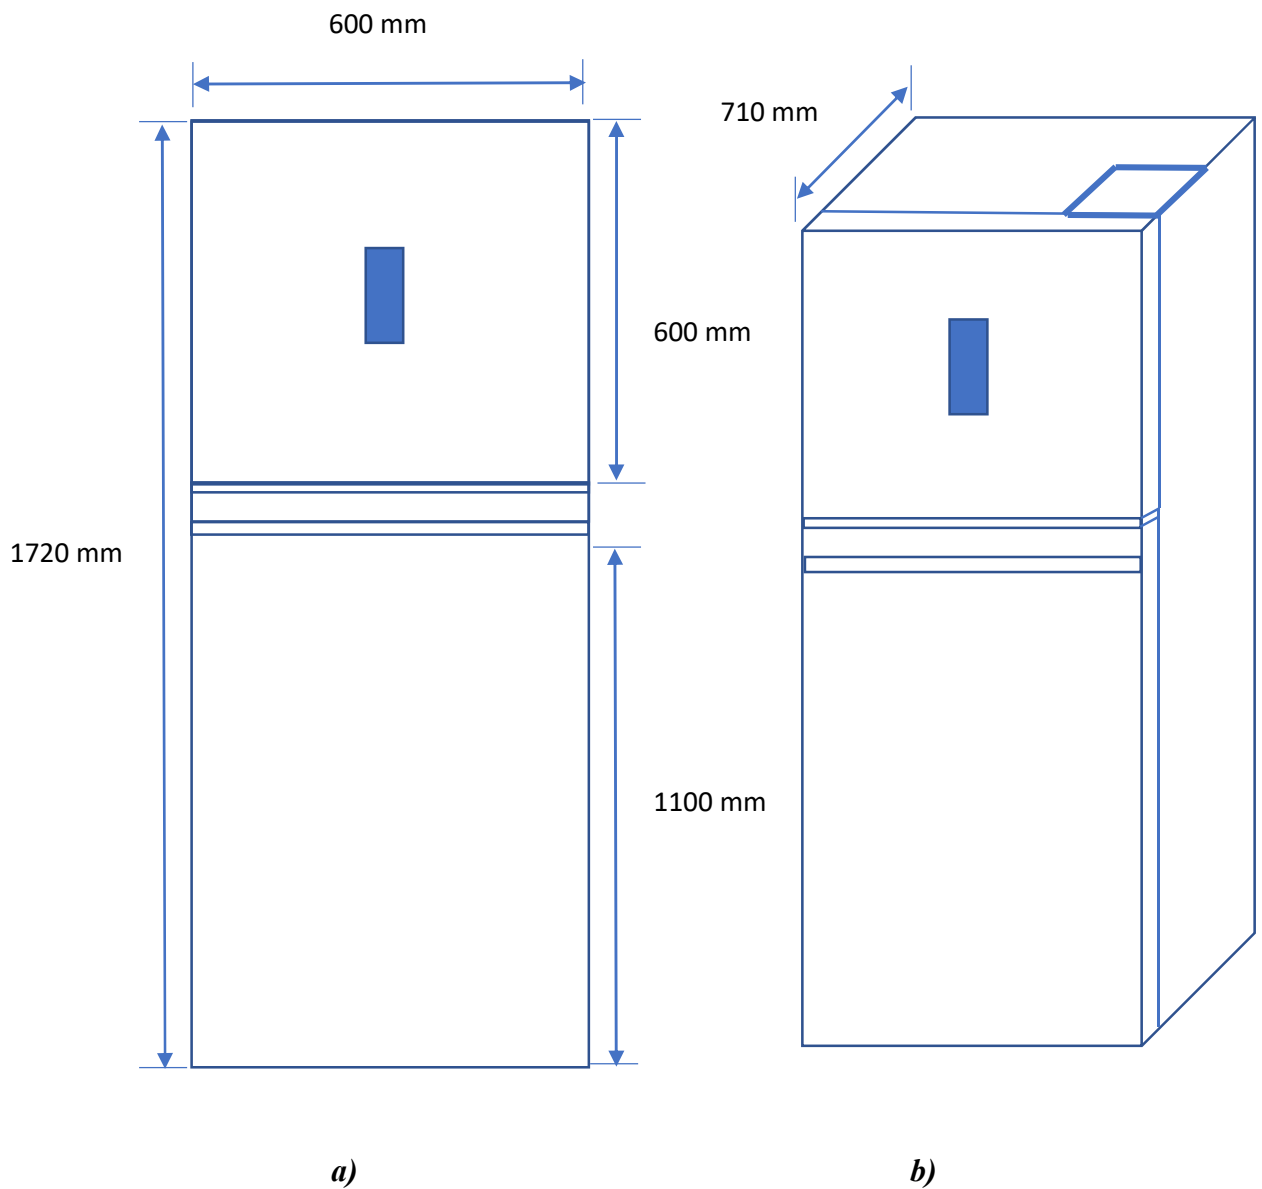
a) Front View, b) 3D View of the model with dimensions
